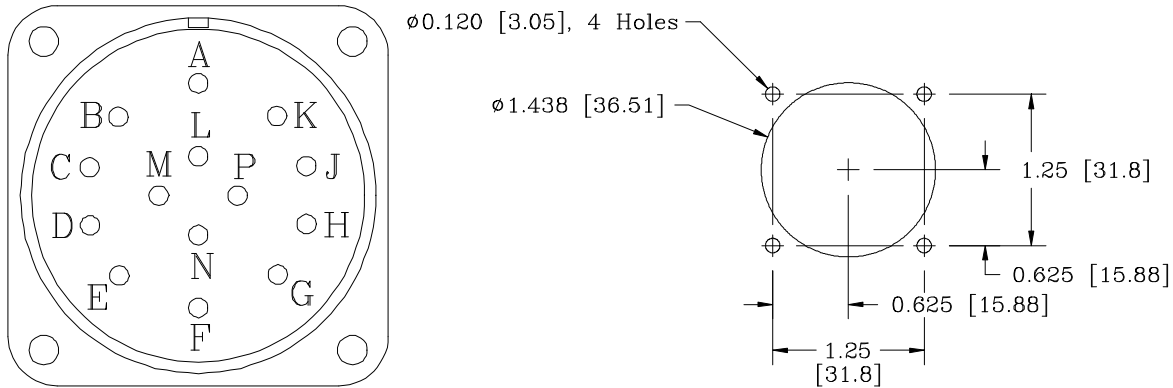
Panel Mount View of the Panel Mount Machine Interface Connector and the Connector's Cut Out Dimensions in Inches [mm]
